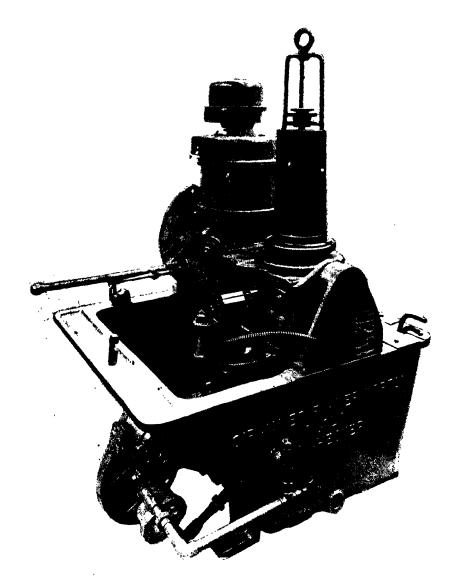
Another type of wet-drawing machine for the production of fine wires
